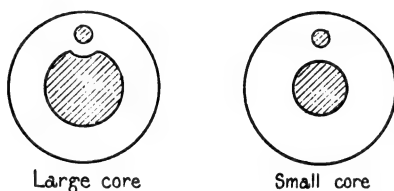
Cross-section of Metal-cored Flame Carbons.
